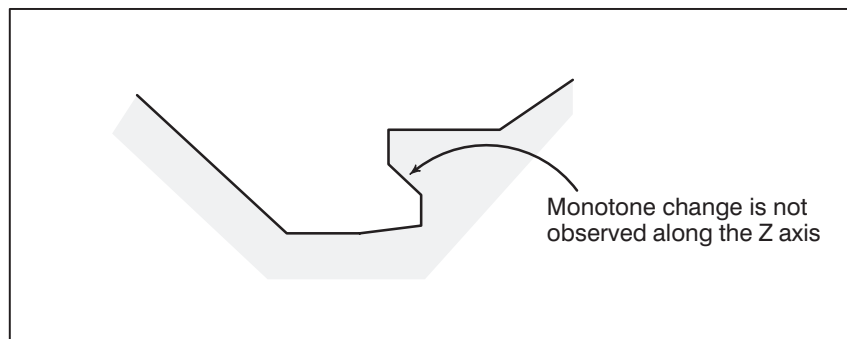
(c) Figure Which Cannot Be Machined in Stock Removal in Turning (Type II)
